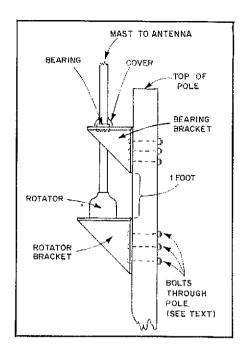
This mechanical drawing shows a side view of the complete installation attached to the wooden utility pole.
